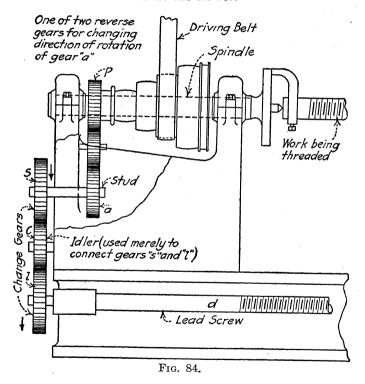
shows a "simple geared" lathe with the names of important parts indicated. The lathe carriage carrying the cutting tool is moved by the lead screw which has usually 2, 4, 6, or 8 threads per in. If the lead screw has 4 threads per in., each complete revolution of this screw moves the carriage and hence the cutting tool ¼ in. along the work being threaded, and 4 turns moves the tool 1 in. along the work. If now we wish to cut 12 threads per in., the spindle must revolve 12 times while the lead screw revolves 4 times. That is,
